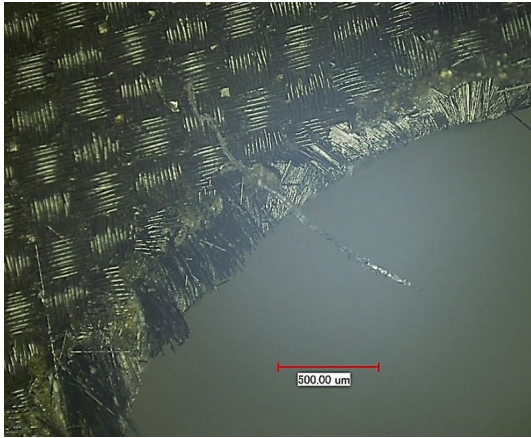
Fibre delamination of CFRP at the hole exit in a mechanically drilled hole
